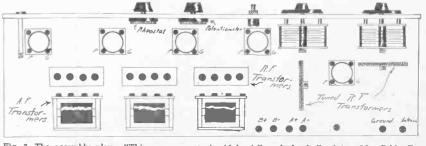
The assembly plan. "This arrangement should be followed closely," advises Mr. Caldwell, "as it has much to do with the results obtained." The diagram shows top view, with the panel in back.
